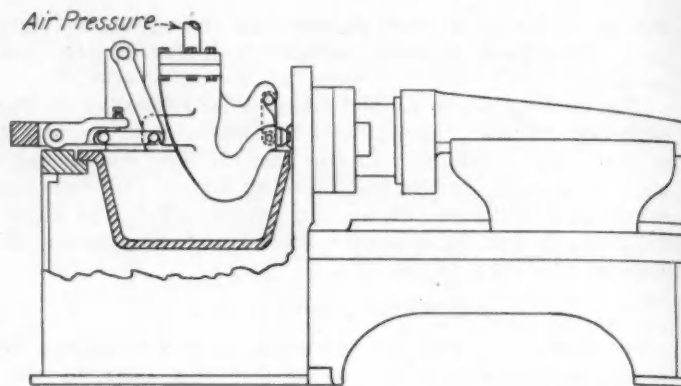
AIR-PRESSURE TYPE OF CASTING-MACHINE
